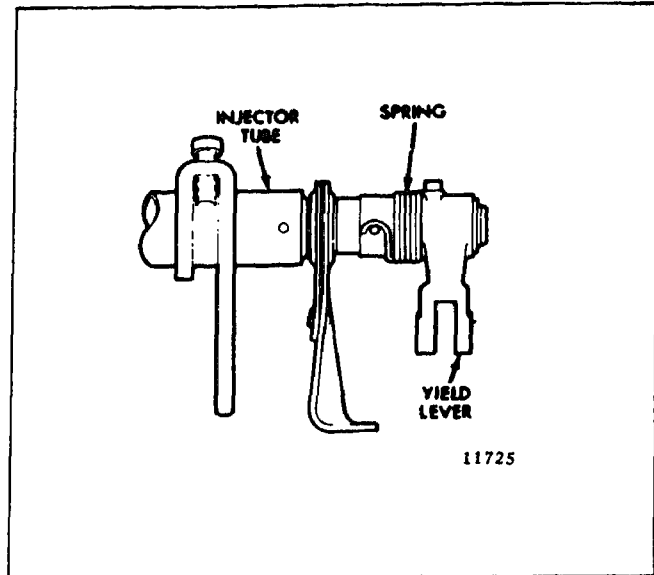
Throttle Delay Yield Lever (In-Line Engine)
